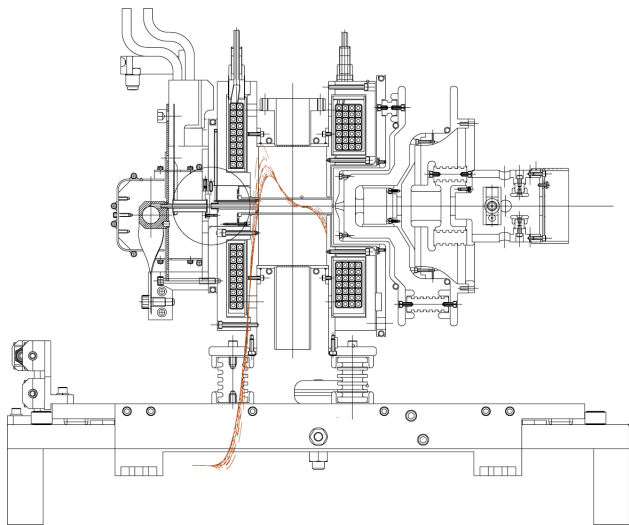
Drawing of the ECR and target assembly as installed on the tray at the bottom of the target module.
